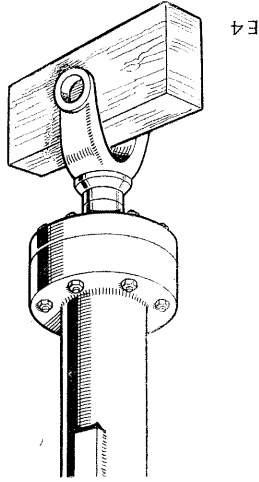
Extractor used as a ram to drive collar on to axle shaft
